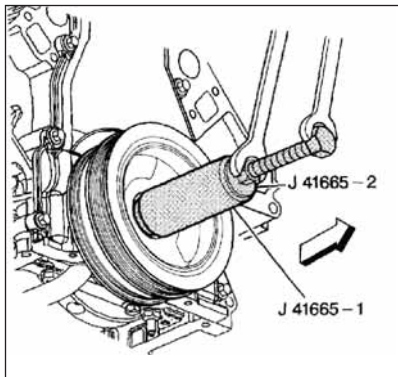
Installer tool J41665 will aid installation of balancer and sprocket.
